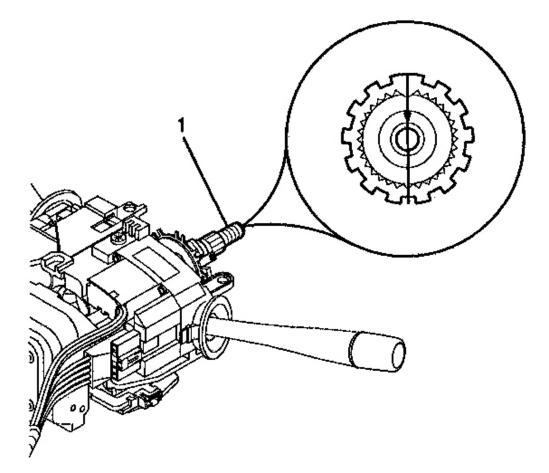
View Of Block Tooth Of Steering Shaft Assembly In 12 O'clock Position Courtesy of GENERAL MOTORS CORP.
